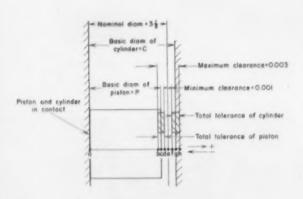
Schematic drawing of piston and cylinder assembly with points, a, b, c, d, e, f, g and h on line of diameters.
